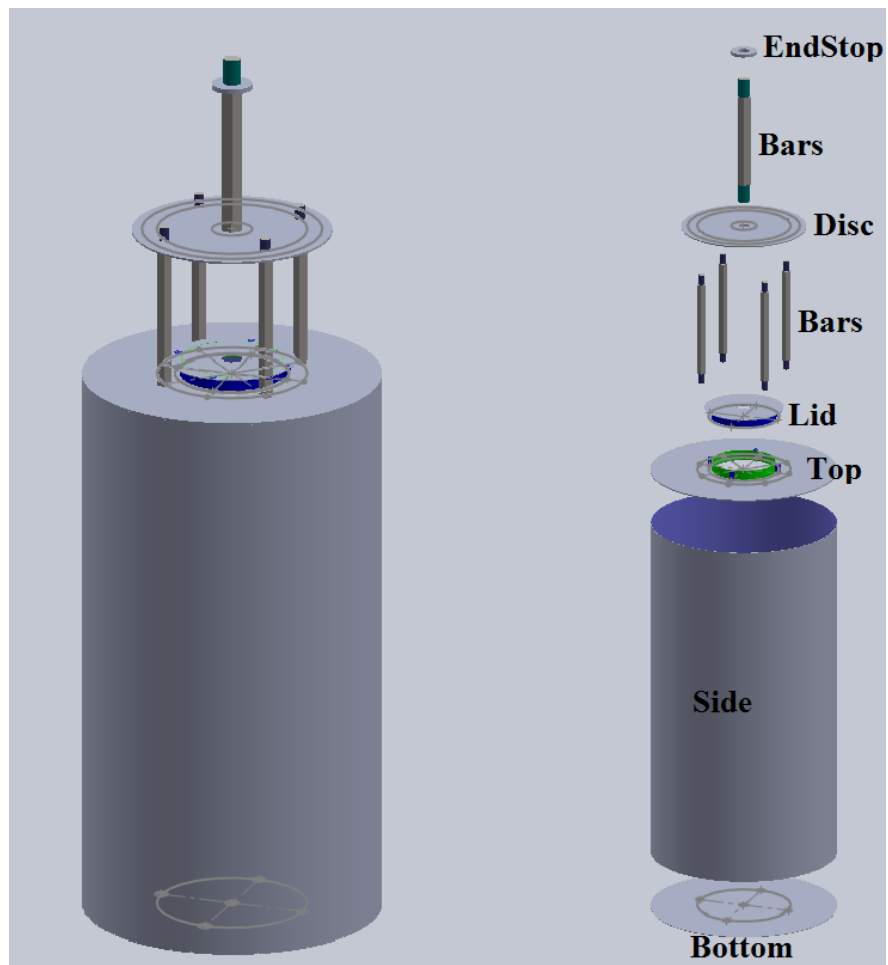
Impression view of the 1/50 scaled PAWEC in SOLIDWORKS®.
